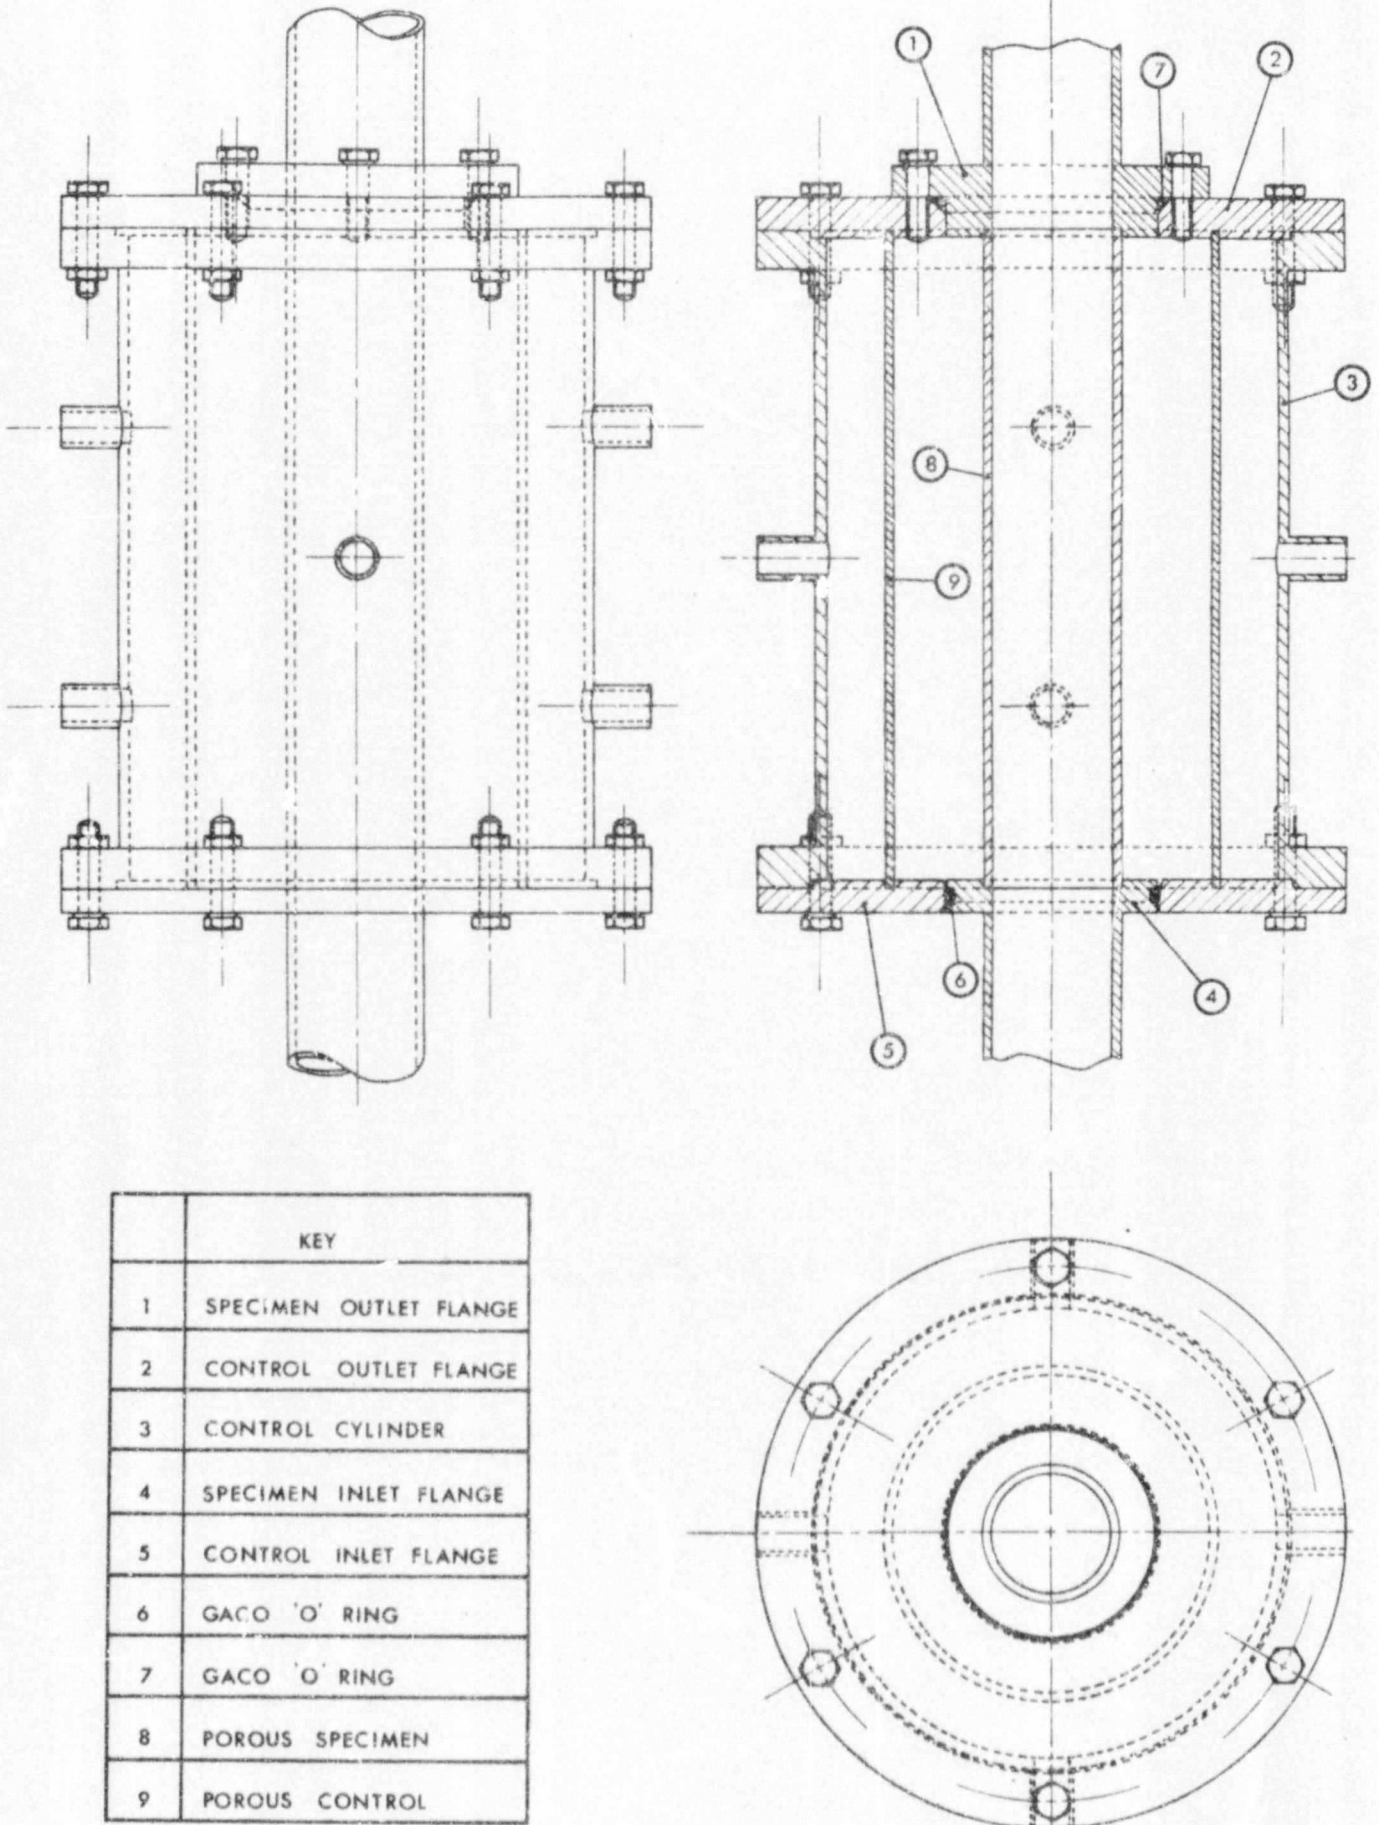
ASSEMBLY DRAWING OF WORKING SECTION
